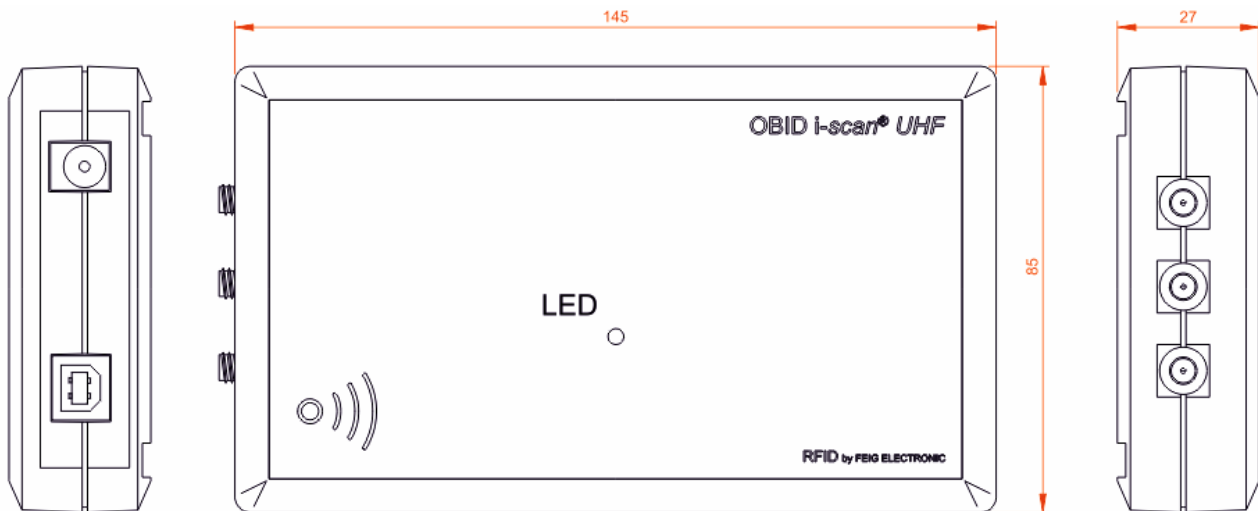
Viewing and Dimensions ID ISC.MRU102-USB (all dimensions in mm)
